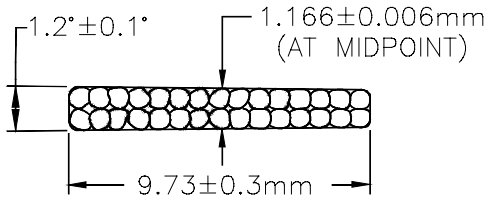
Cross section of the cable to be used to fabricate coils for LHC dipoles.
